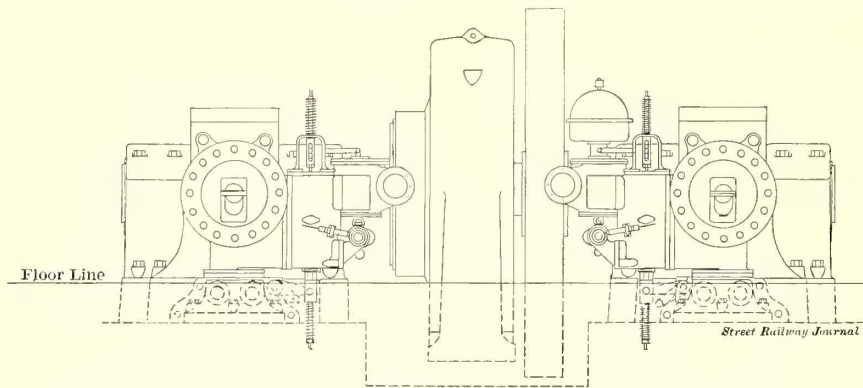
END SECTION OF 1500-HP HORIZONTAL GAS ENGINE
